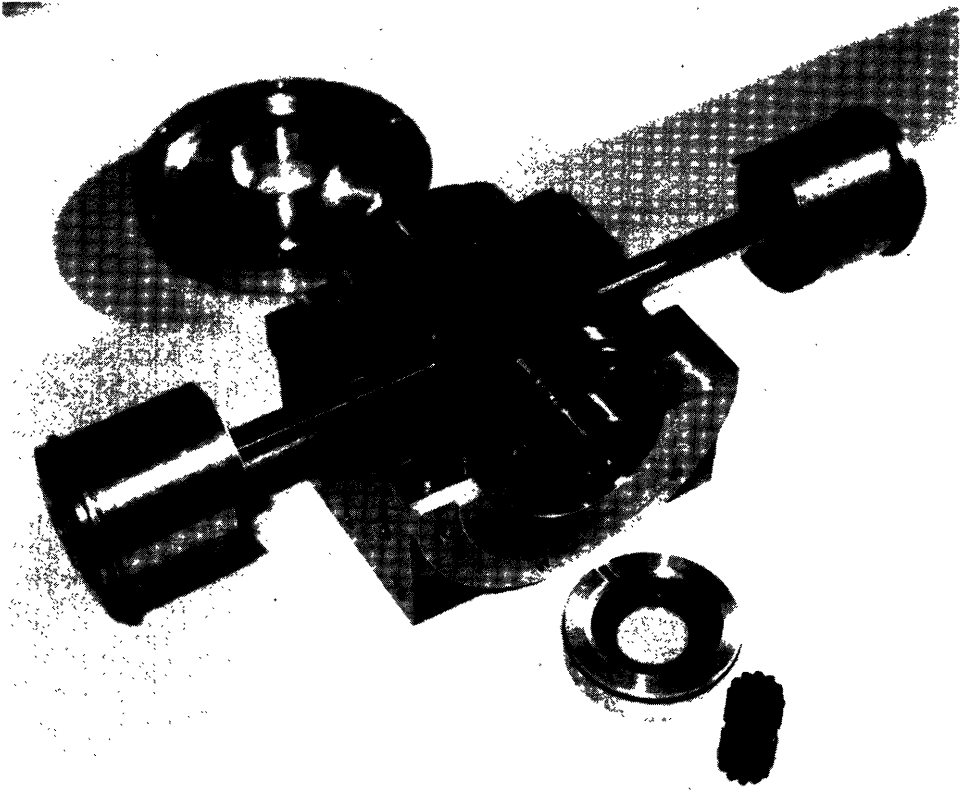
Complete crankassembly with pistons and bottom casing. In front: gasket and coupling element.
